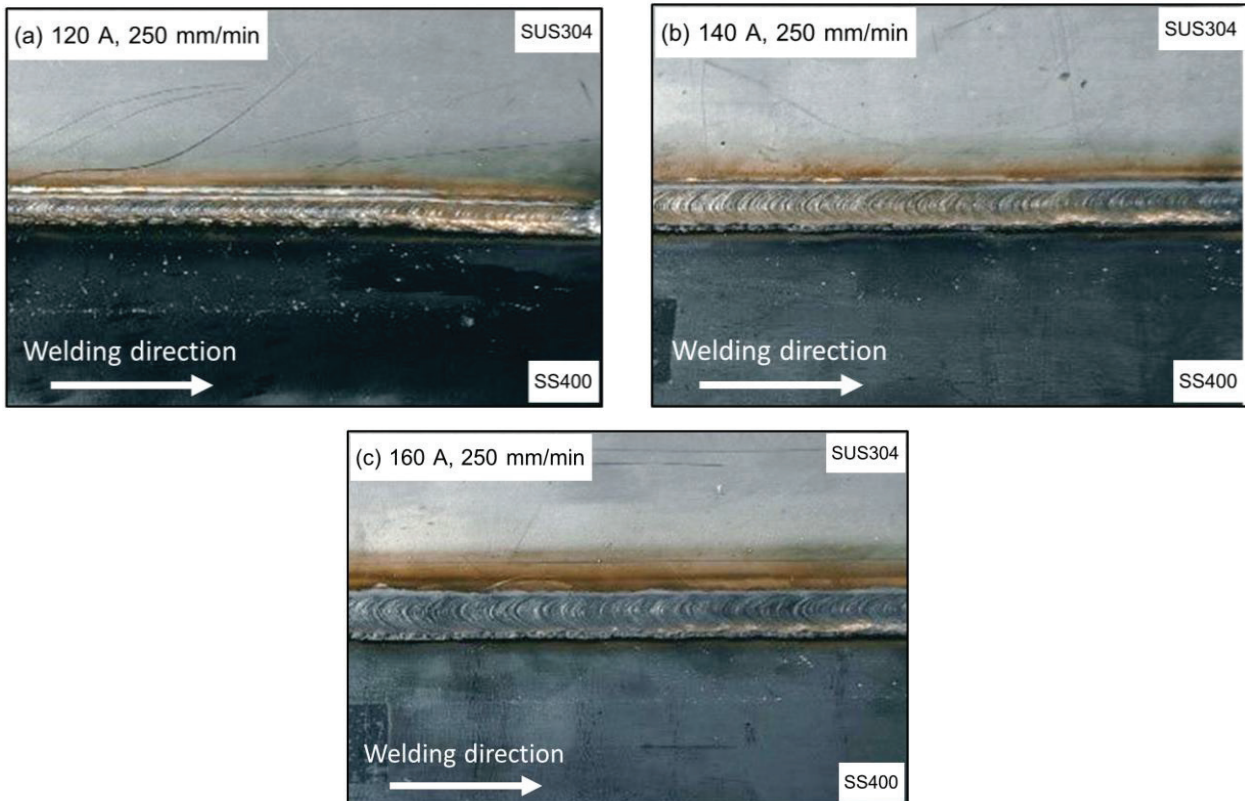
Surface characteristics of the weld seam on a welding speed of 250 mm/min and the welding current of (a) 120 A, (b) 140 A, and (c) 160 A.
